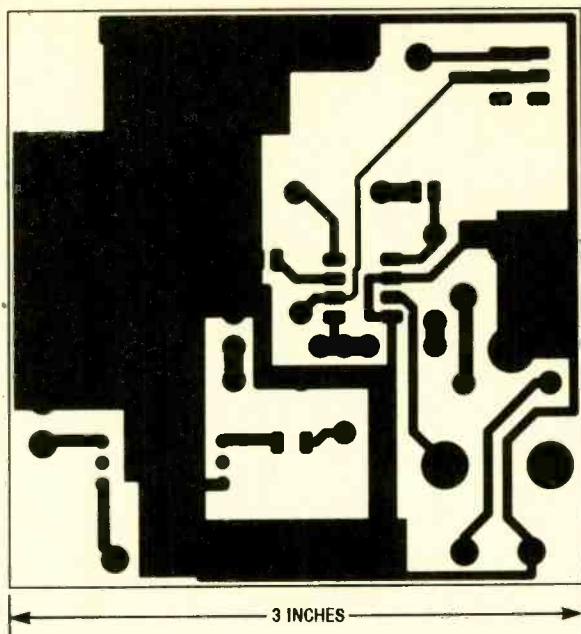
You can make your own printed-circuit board from this foil pattern.
